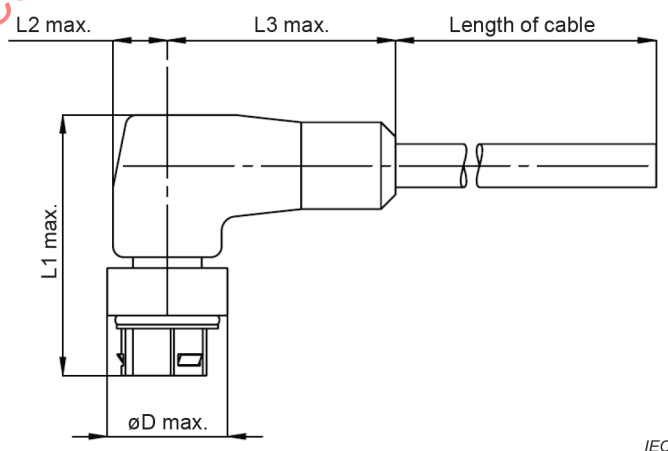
Style MM_PPI – Non-rewirable connector, male contacts, right-angled version, with inner push-pull locking
